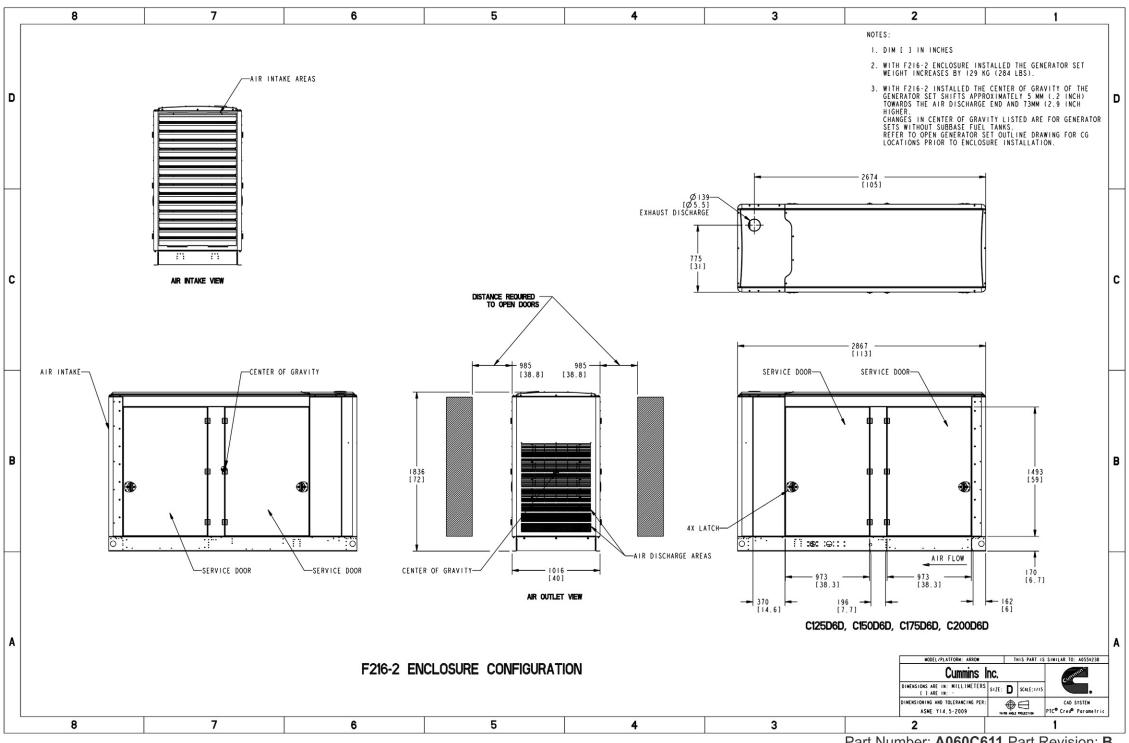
OUTLINE ENCLOSURE DRAWING (SHEET 2 OF 2)
